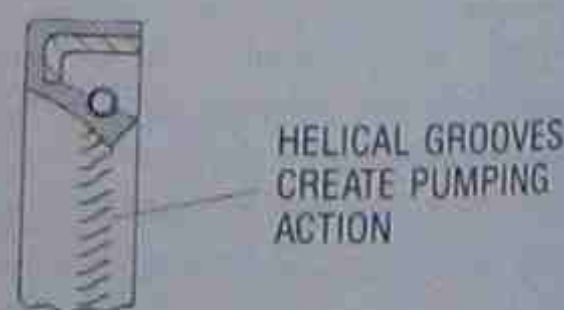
Moulded grooves in the atmospheric side of the seal lip help to prevent leakage.
